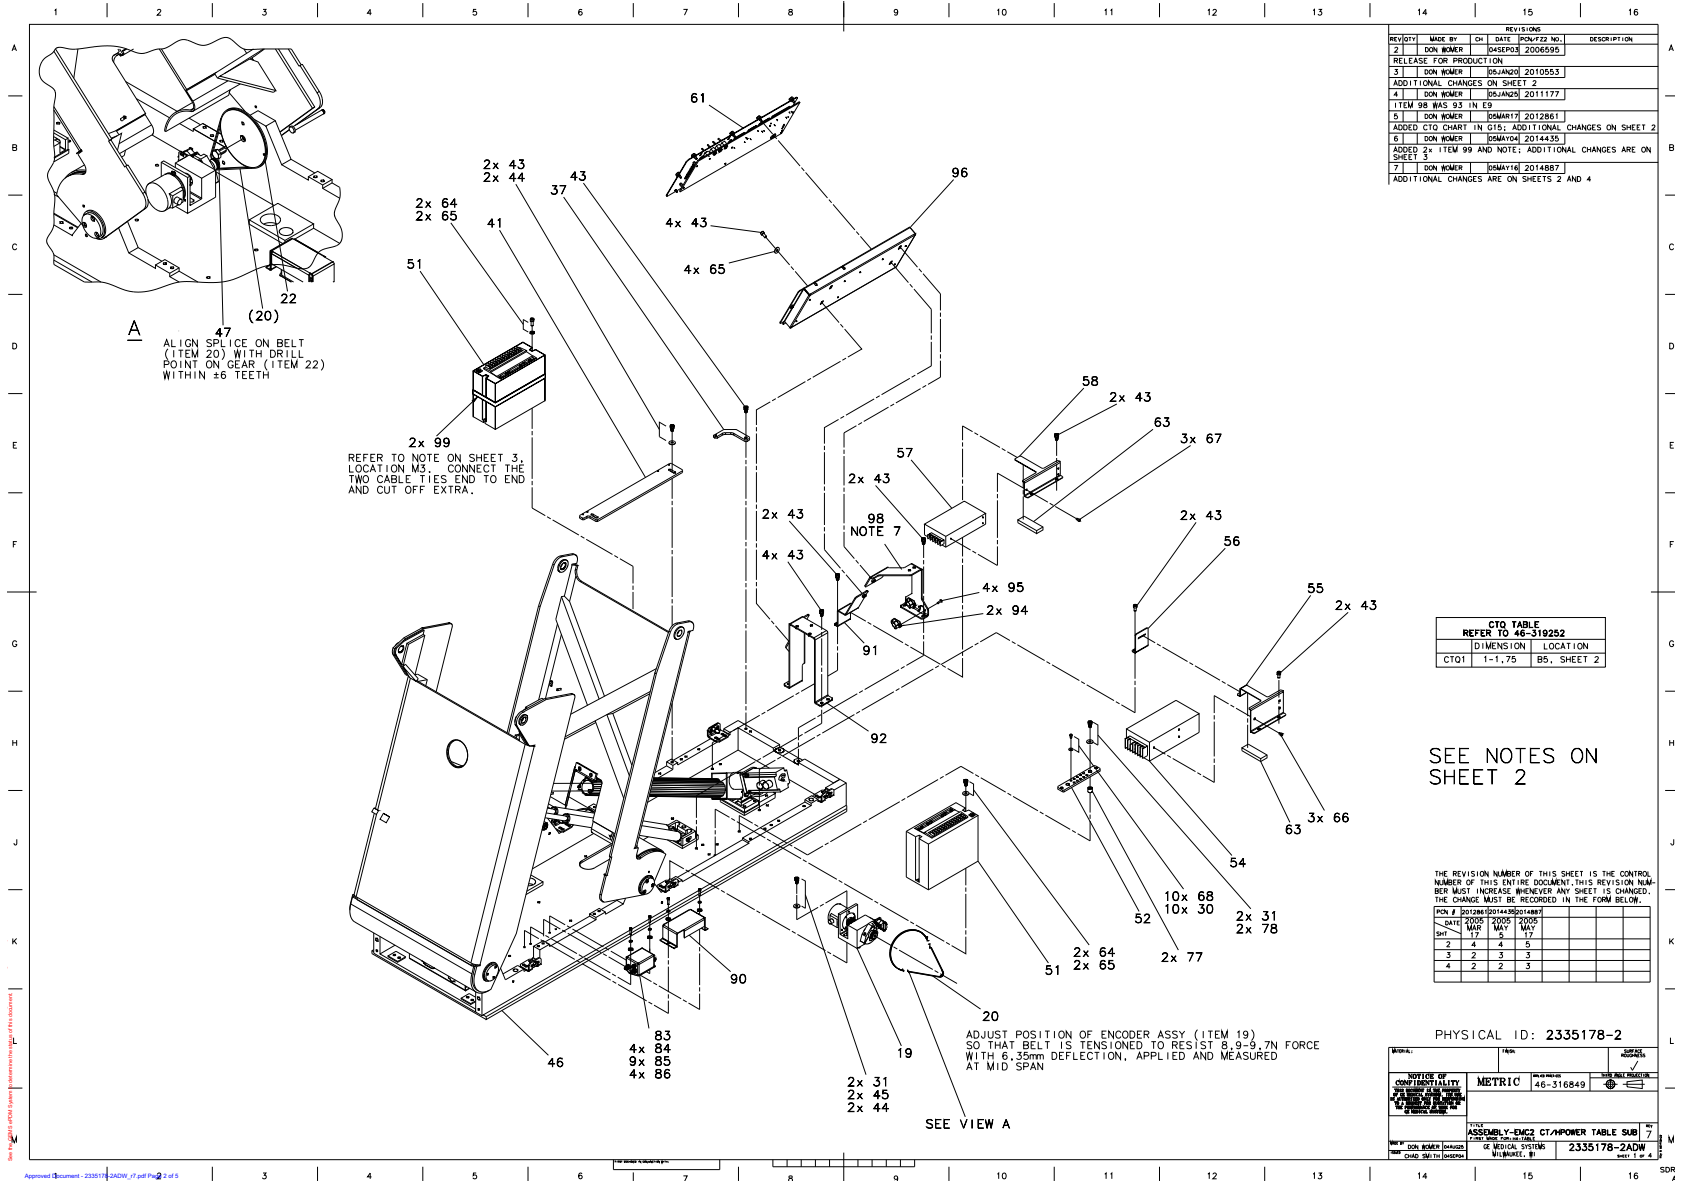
Table Subassembly (2335178-2, sheet 1, rev 7)
